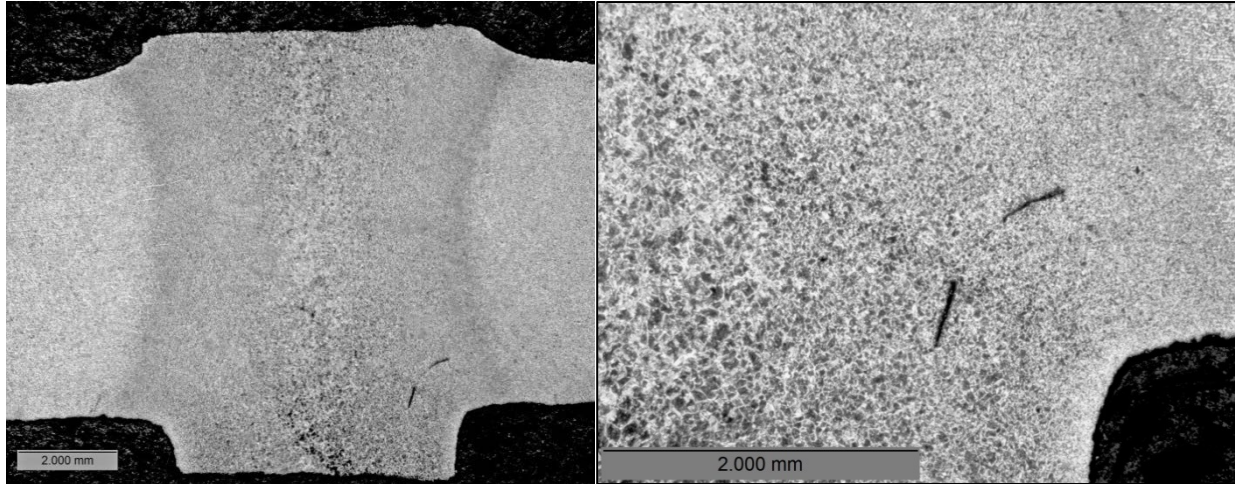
A section of Defect #1. The defect did not break in the desired plane, so the defect was sectioned circumferentially perpendicular to the plane of the defect. The defect height appears to be about 1.0 mm and 0.35 mm from the flash weld trim on the IDs
